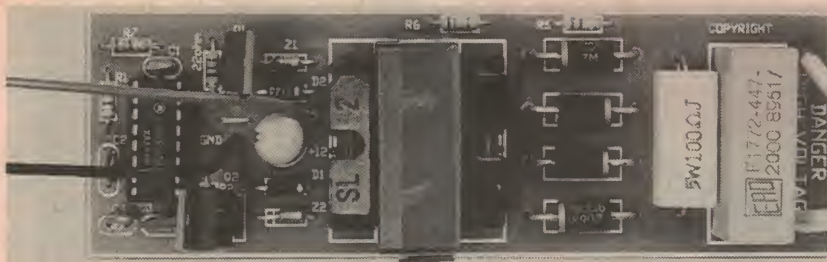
This photo shows a close up of the inverter PCB. The MOSFETs in this board are type MPT50N05E and have a different package to the specified P222 devices. See the layout diagram for details.
